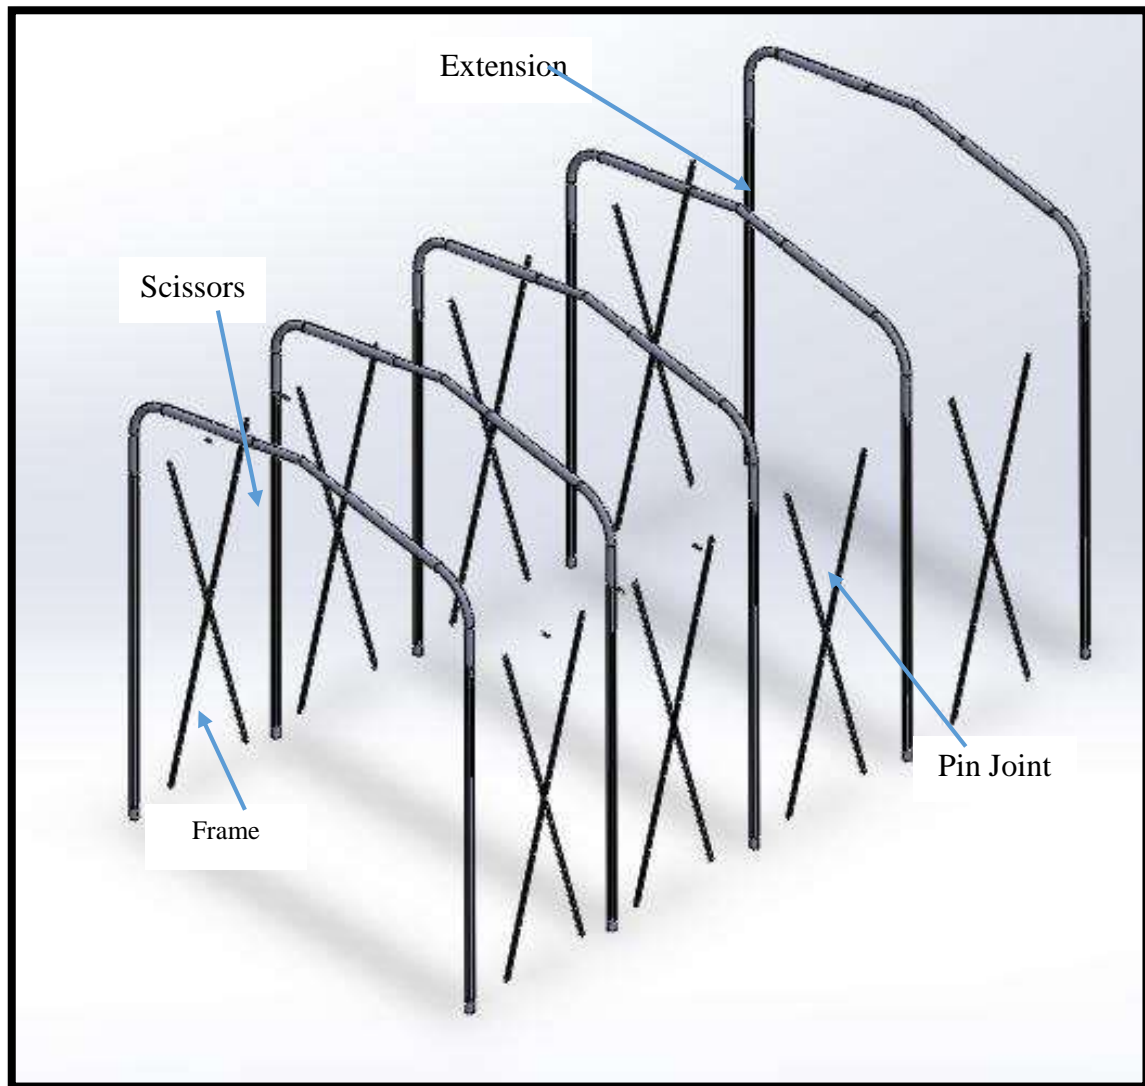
Exploded view of Frame & Scissor Structural Mechanism
